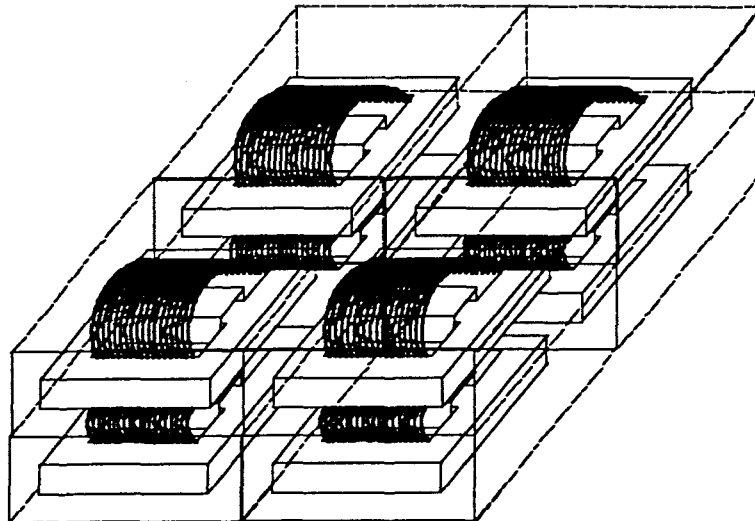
Double layer packing of elements in a multiple core assembly
